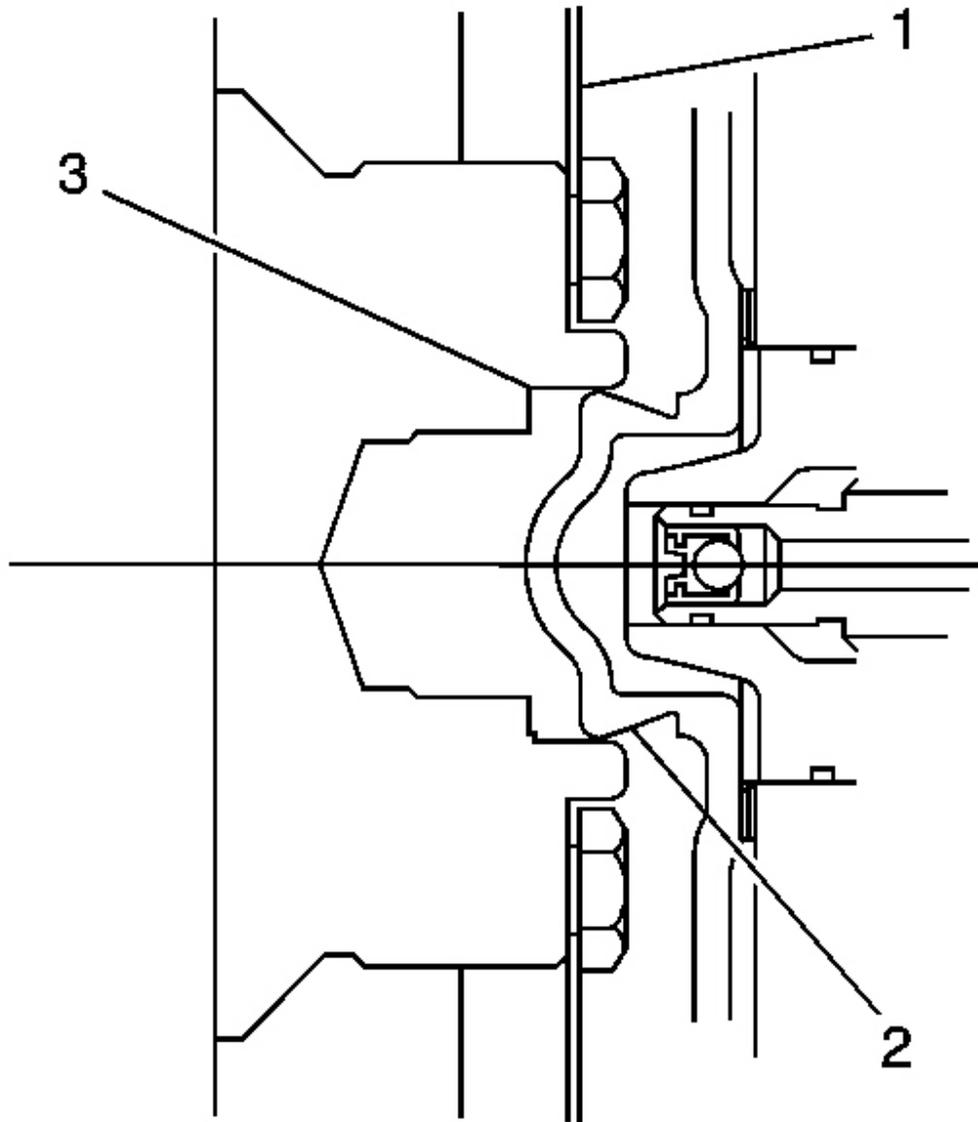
Aligning Torque Converter Hub In Engine Crankshaft
